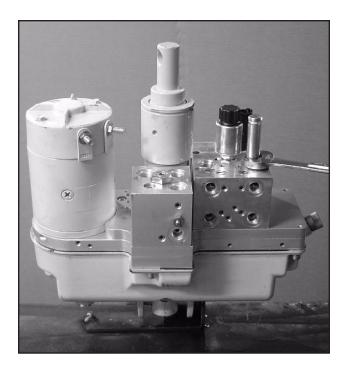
The "S5" Cartridge is removed using a 7/8" wrench or deep well socket.
